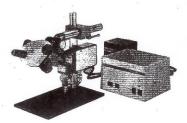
Model 50F Light Force Weld Head with optional Microscope and Unibond II(R) Constant Voltage Power Supply.
